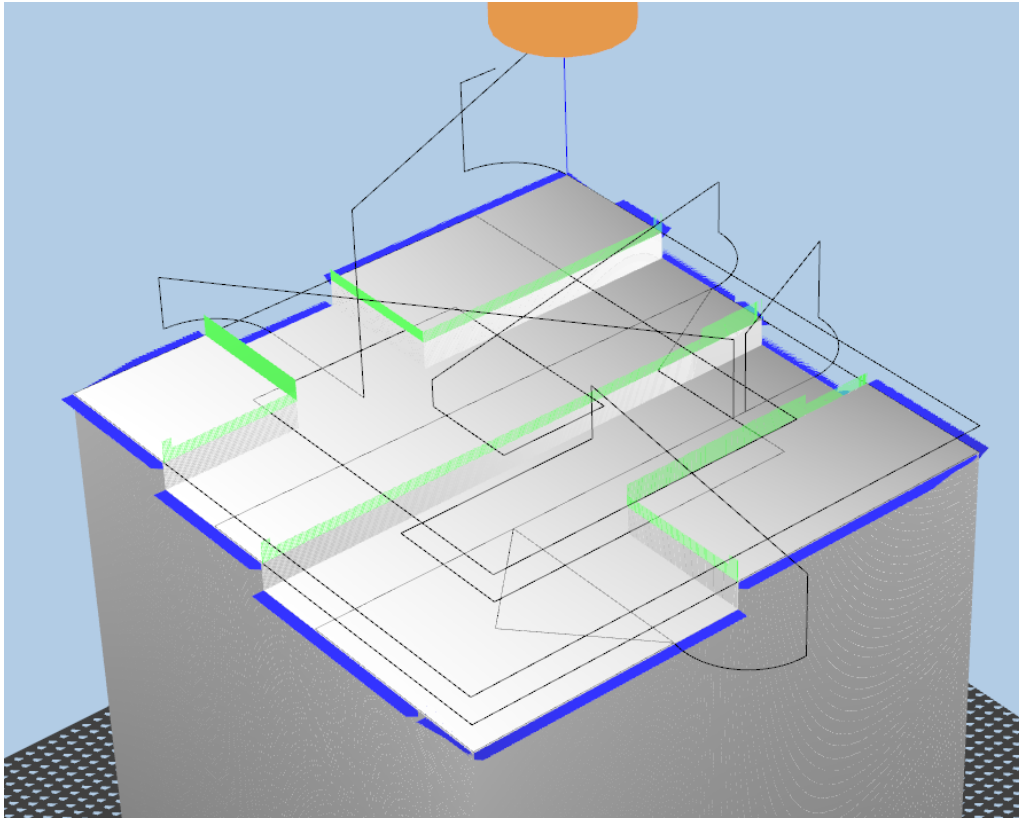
Tool path A in down milling (burr height = 200 μm).
